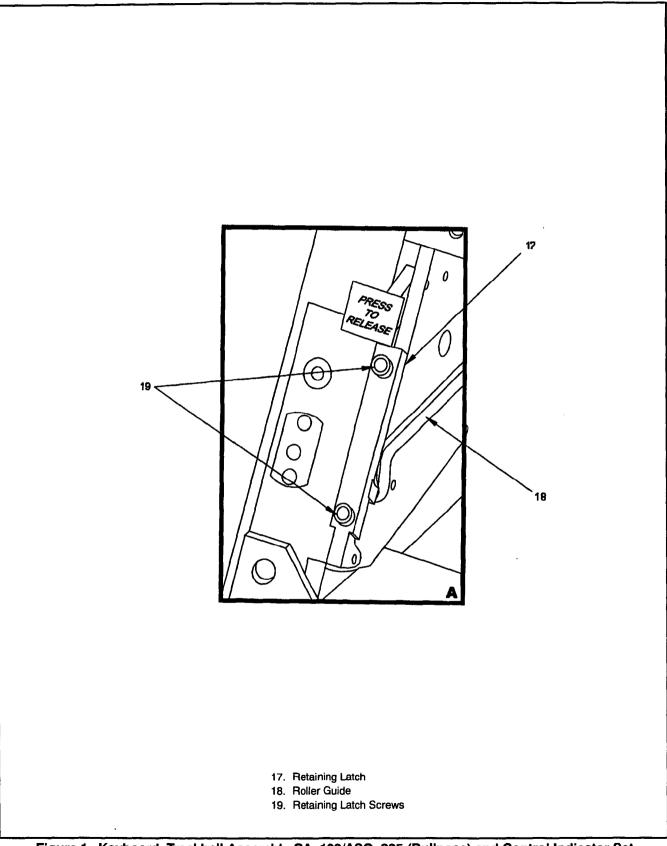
Keyboard-Trackball Assembly CA-103/ASQ-225 (Bullnose) and Control Indicator Set AN/ASQ-225 Components (Sheet 4)
